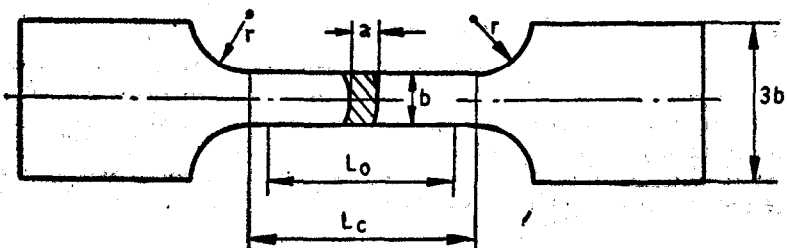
STRIP TEST SAMPLE CUT FROM TUBE
